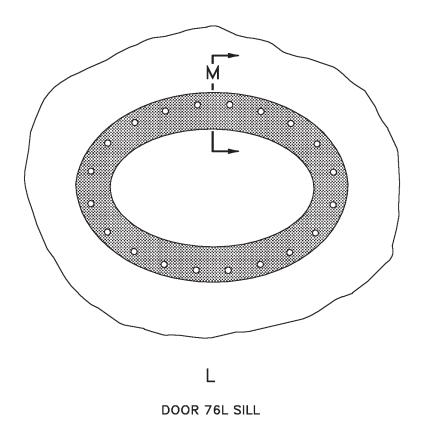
Inner Wing Upper Surface Solid Composite Laminate and Door Sill Inspection Areas (Sheet 5)
